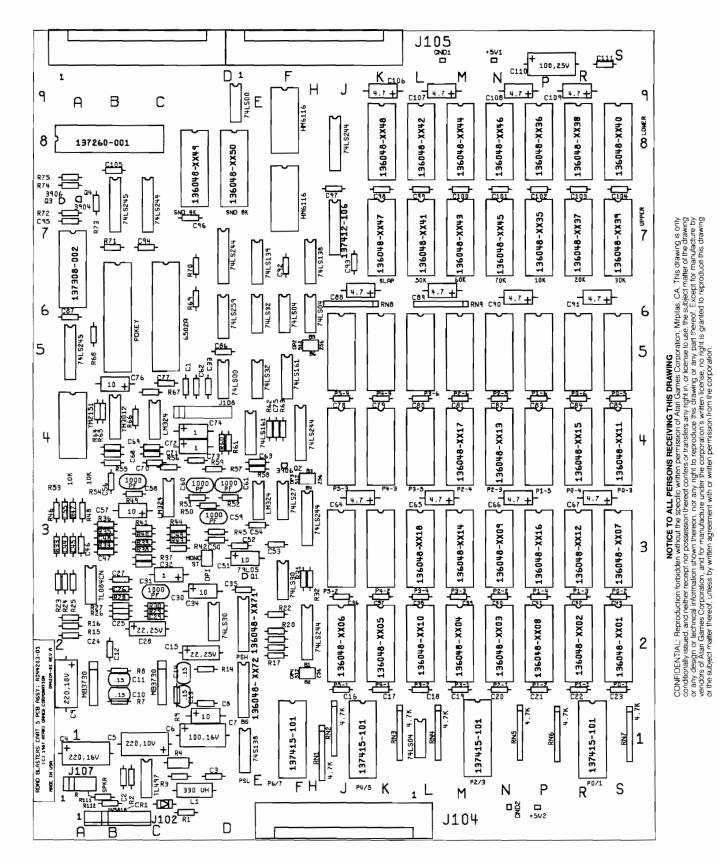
Road Blasters/Cockpit Cartridge 5 PCB Assembly A044203-01 B
